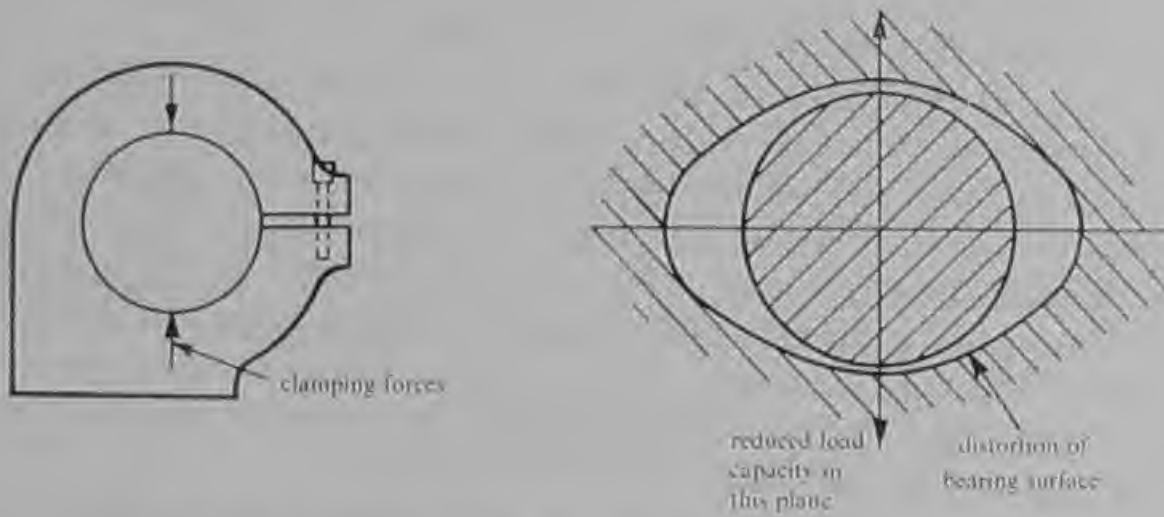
Loss of load capacity due to distortion caused by radial clamping of machine tool spindle
